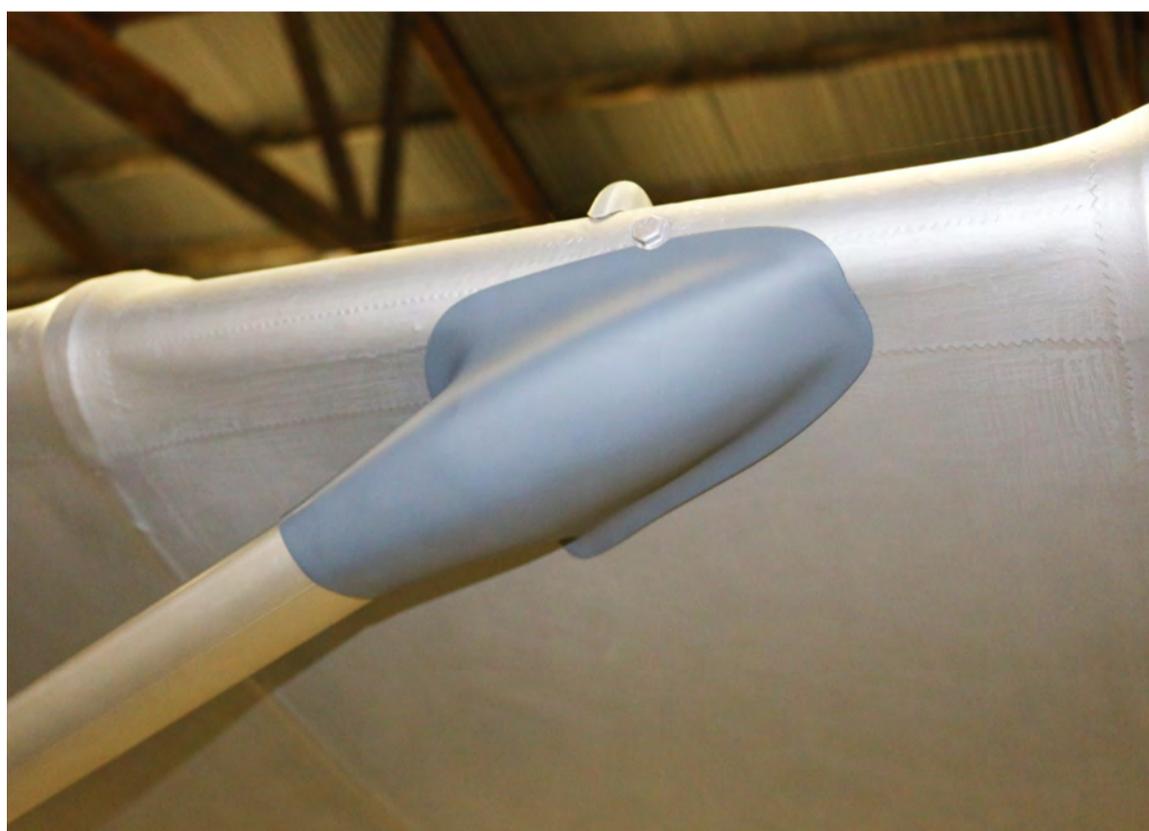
Using HIPS Plastic For Printing Large Parts (EMG-6 Electric Motor Glider) Wing Strut Fairing
